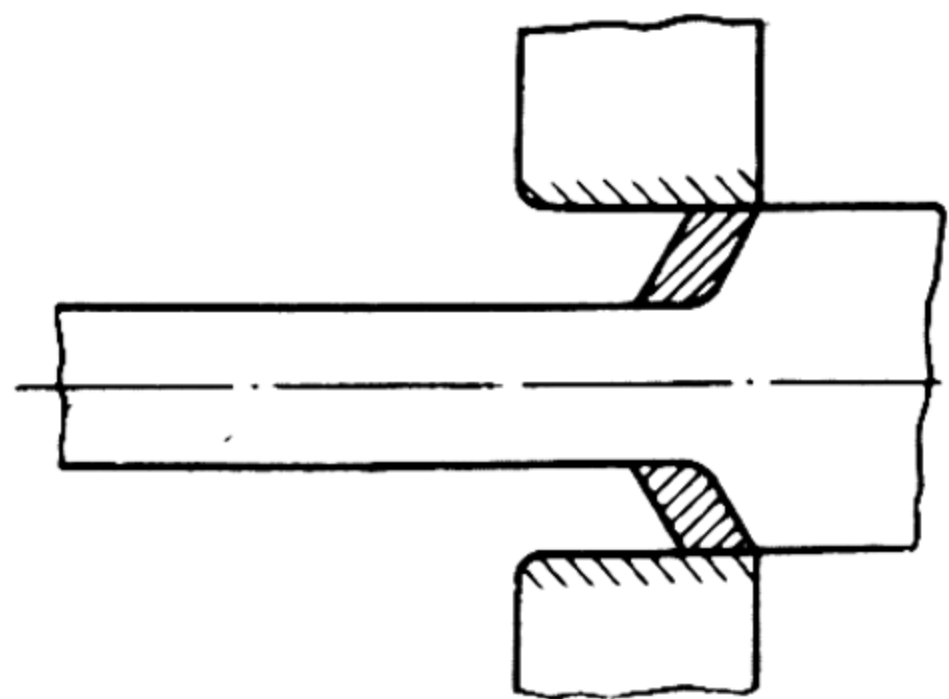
Drawing-out (reducing) a piece of stock with short grips
